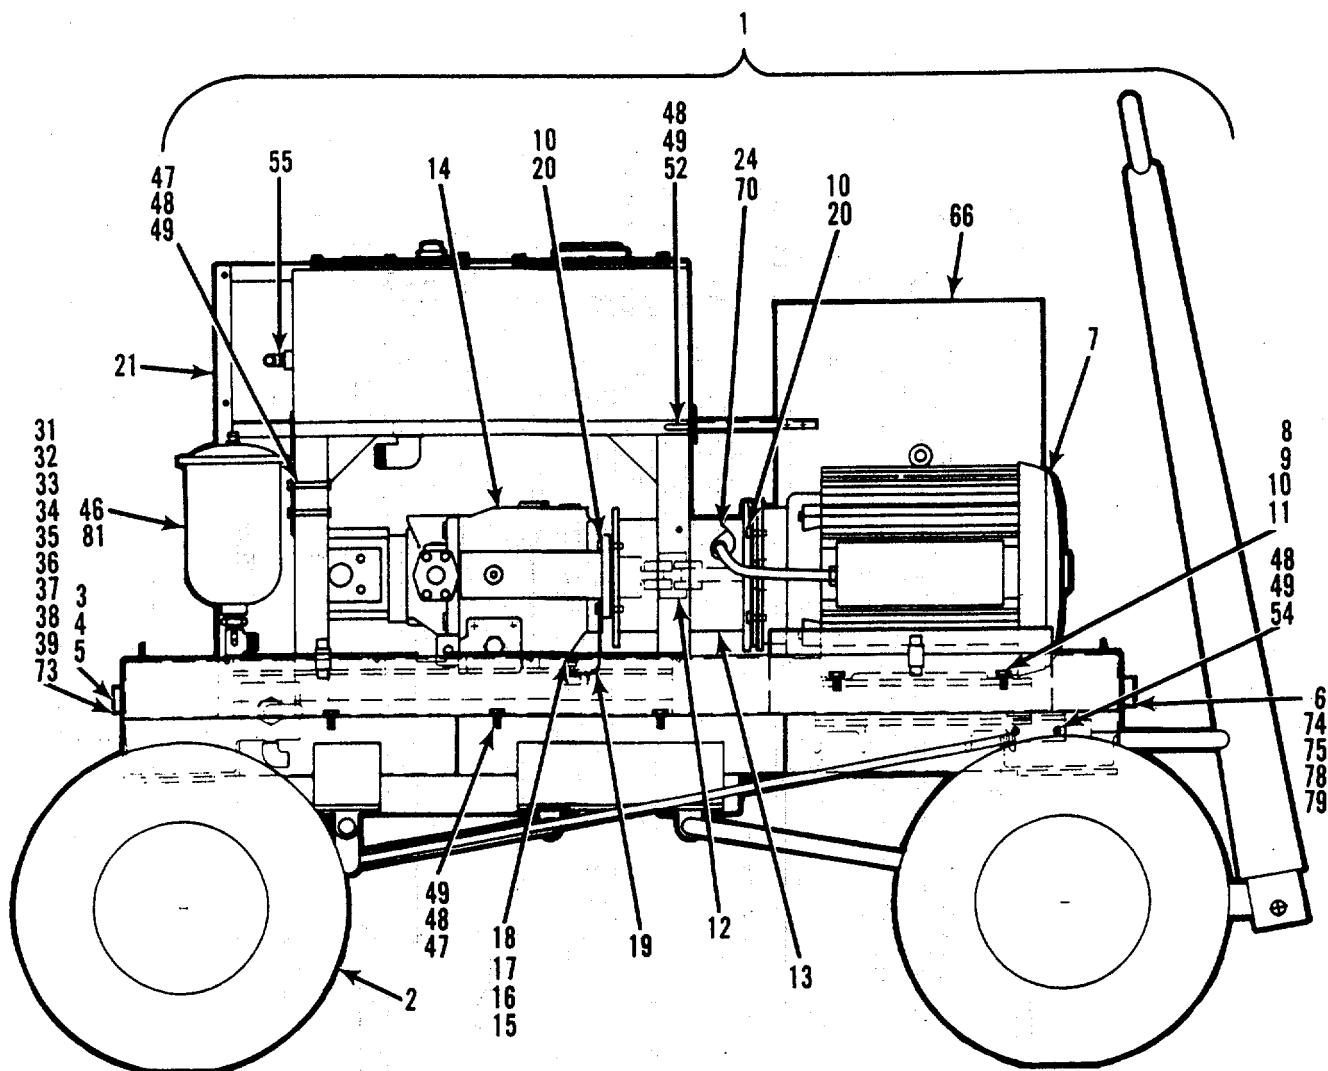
Internal Components Assembly, D-6A (Sheet 1 of 3)
